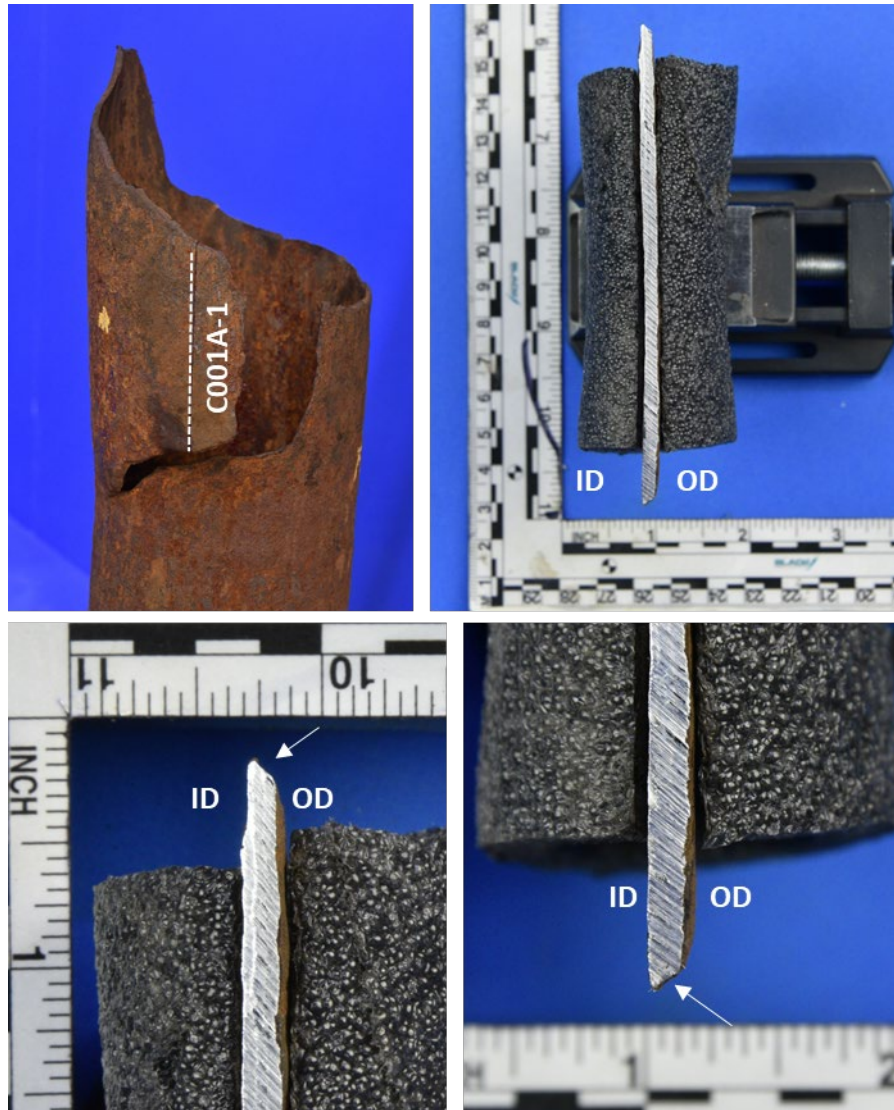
Circumferential Fracture Surface in C001A-1A Specimen
